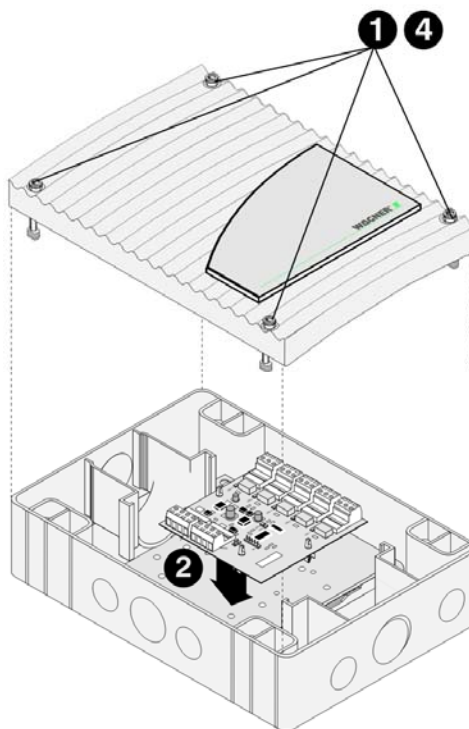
Incorporating the relay board into the TITANUS MICRO-SENS® additional housing
